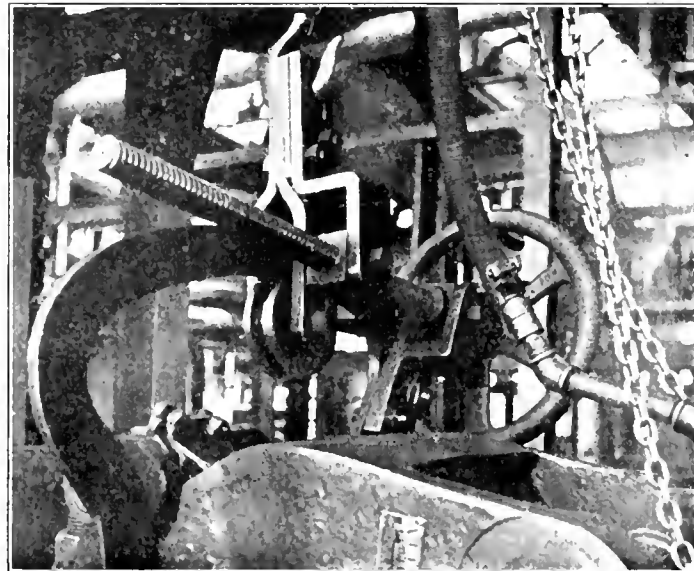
Suspending Mechanism for Bull Rivetters.
